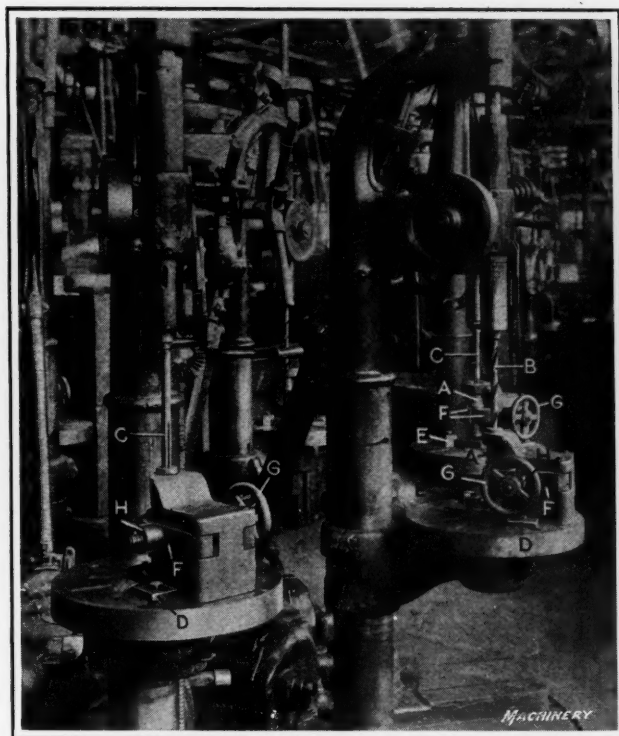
Close-up View of a Drilling and a Reaming Machine showing Arrangement of Interchangeable Work-holding Fixtures
